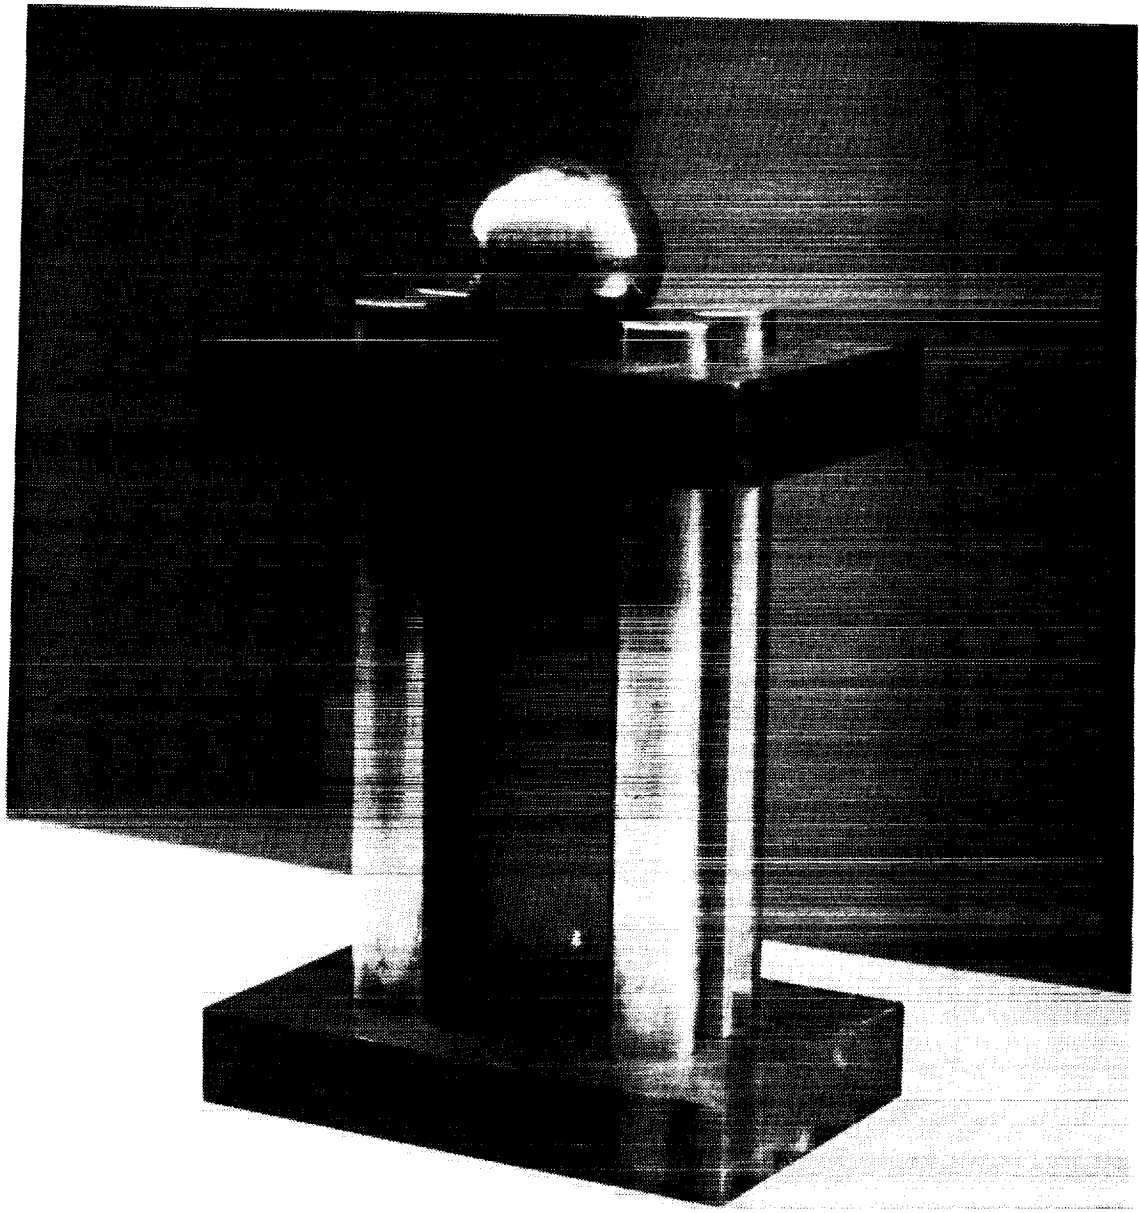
First generation crush test fixture, photograph taken of fixture from reference [5].
